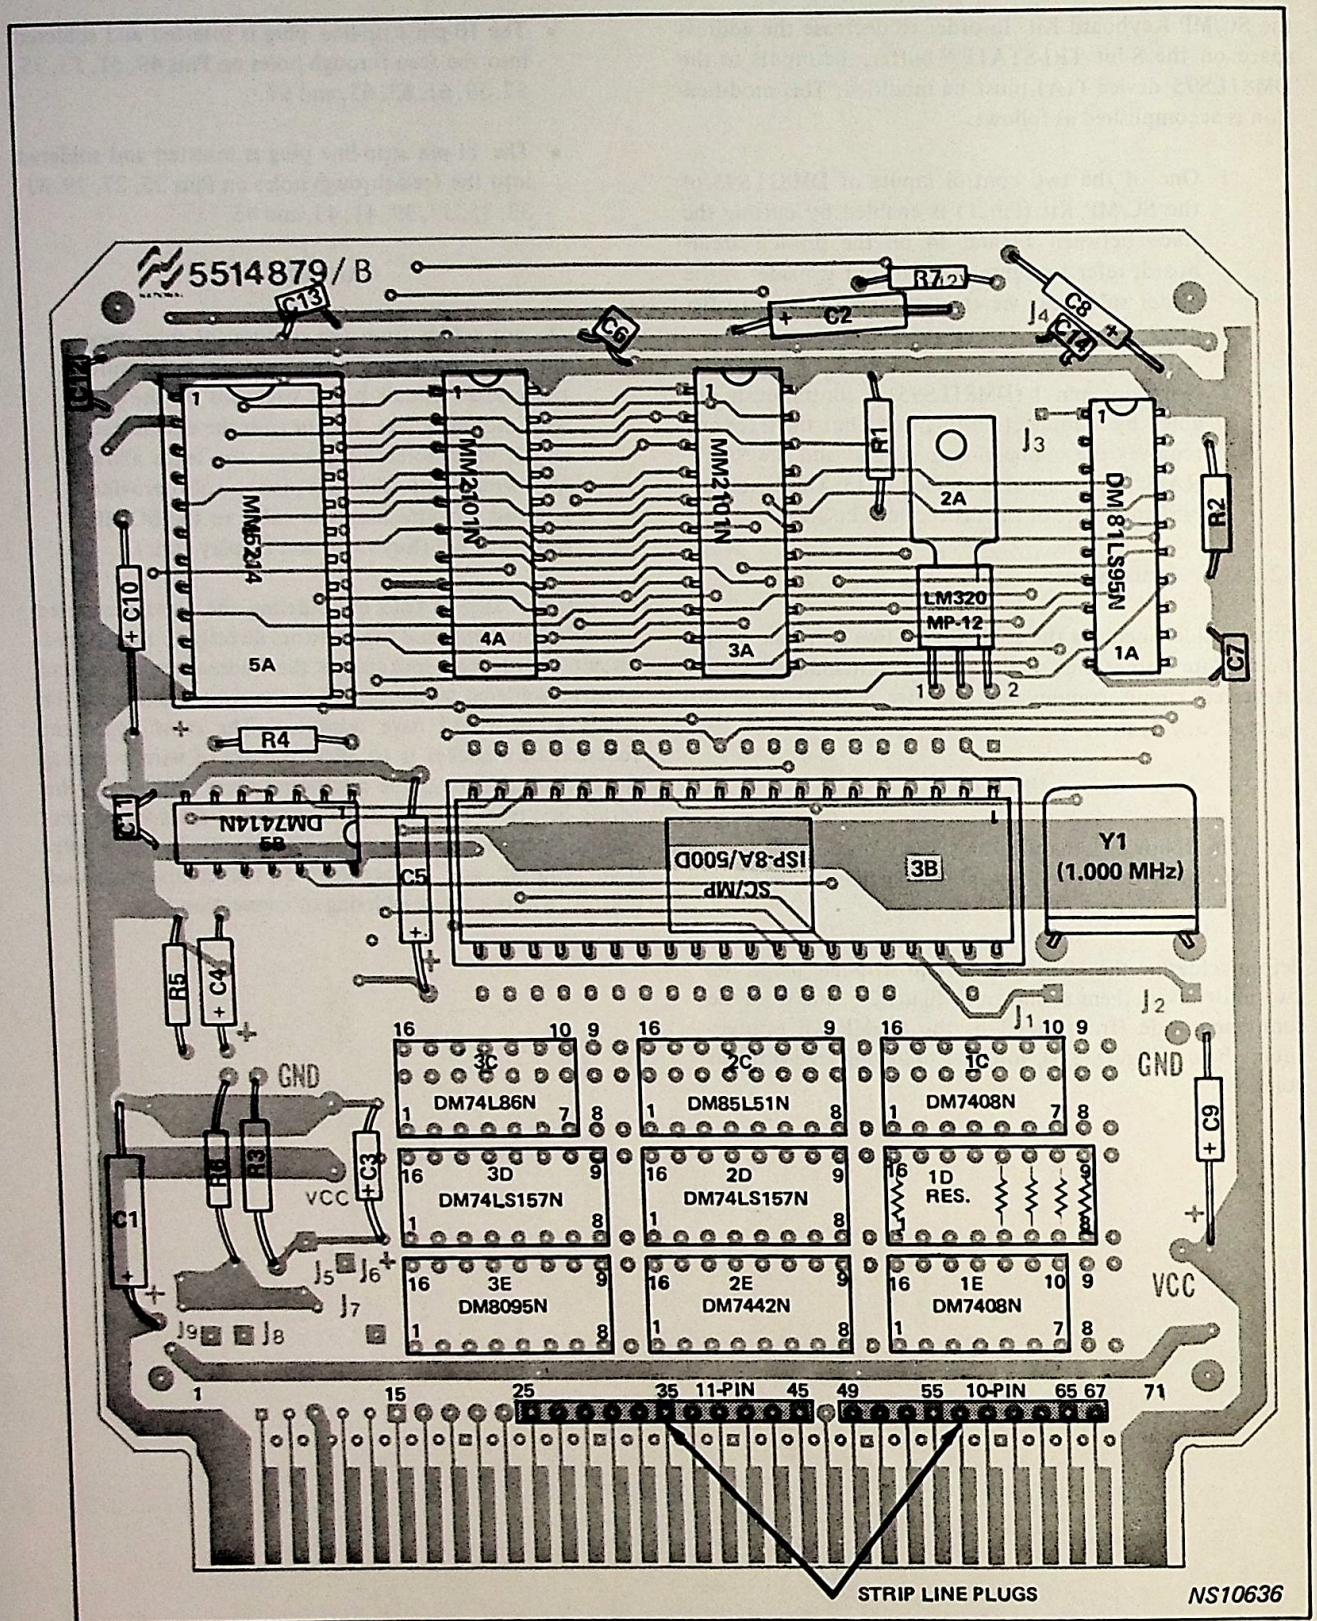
Layout of SC/MP Kit Printed Circuit Board (Front) Component View
